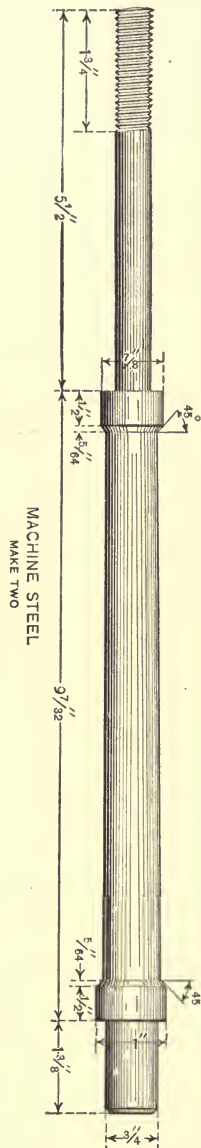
SIDE RODS FOR UPRIGHT ENGINE.
